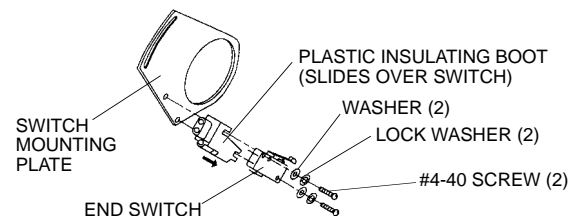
END SWITCH AND INSULATING BOOT ASSEMBLY
